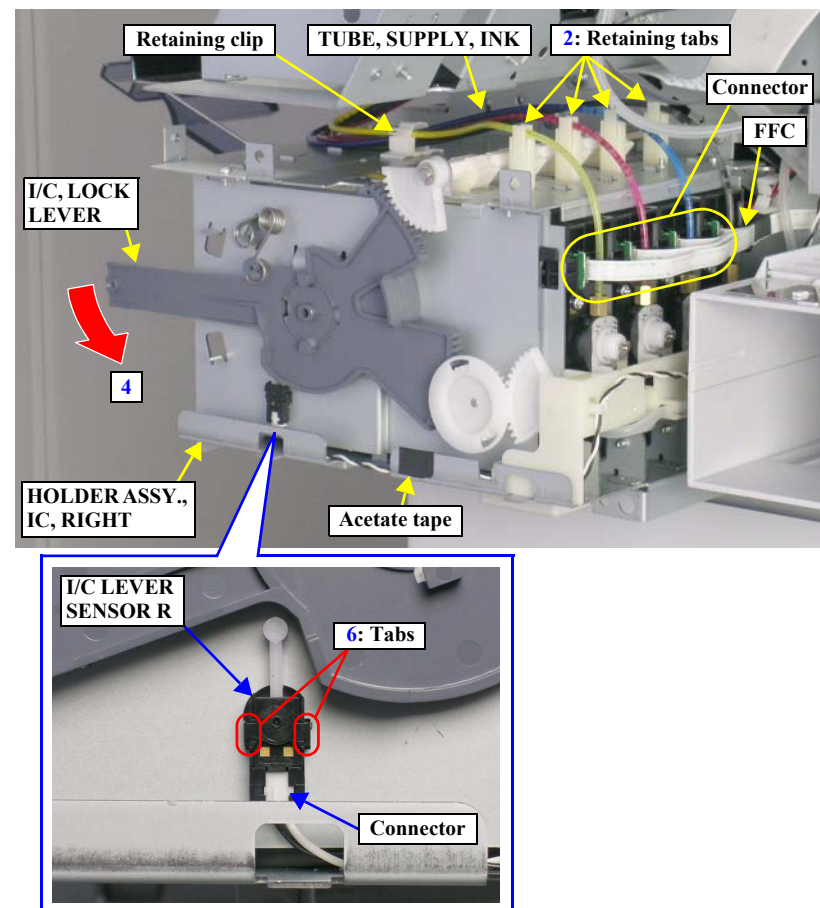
Releasing the TUBE, SUPPLY, INK and Removing the I/C LEVER SENSOR R
